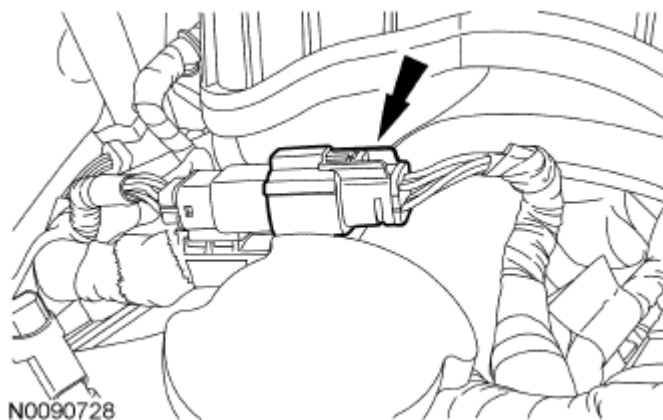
Locating Fuel Injector Wiring Harness Electrical Connector
